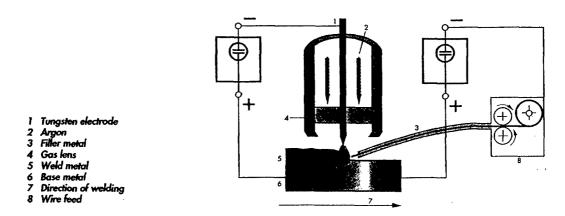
Gas Tungsten-Arc Hot Wire Welding (GTAW-HW)
